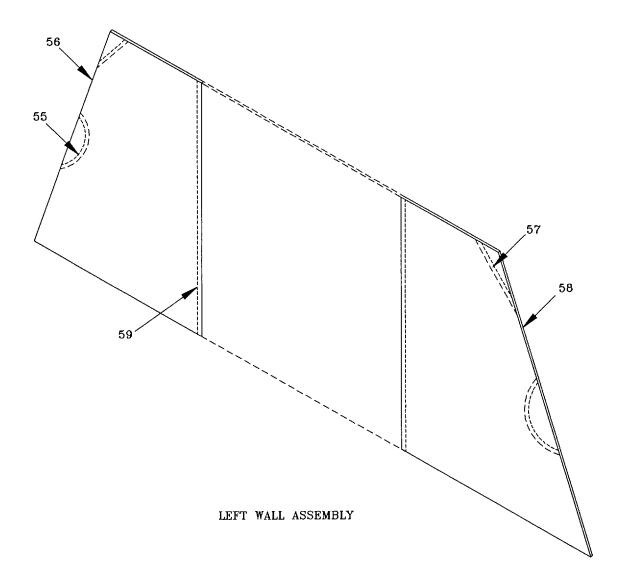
Tent Body Assembly (Sheet 4 of 7)
